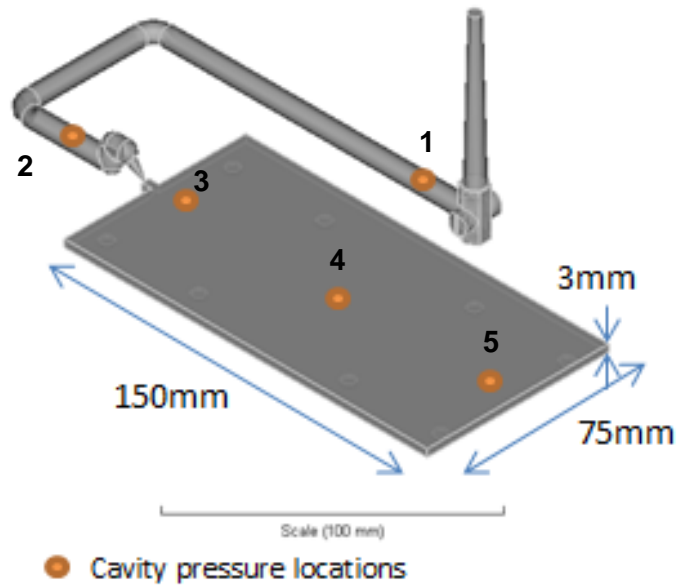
Schematic showing the location of the pressure sensors within the plaque mold.
